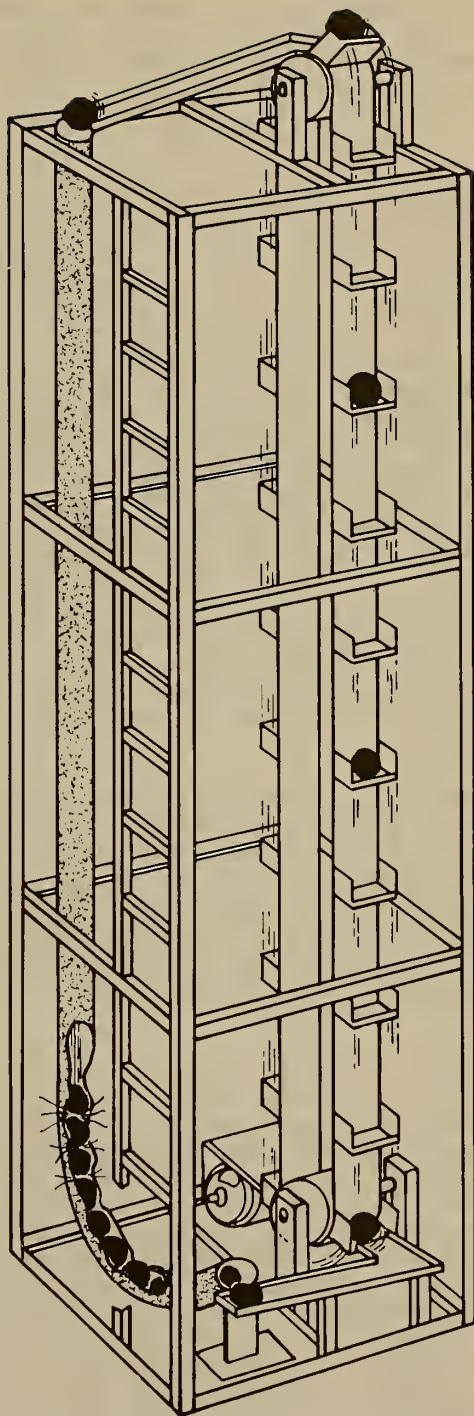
Ball-on-ball impact-spalling test machine, schematic.
